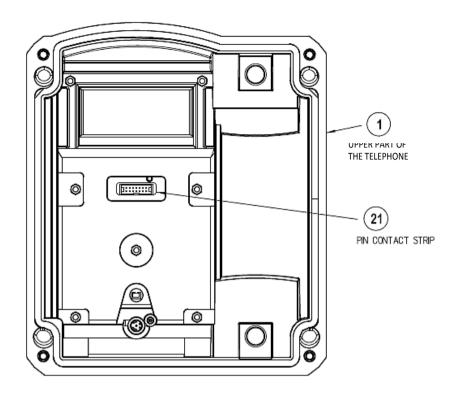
Inside view of telephone upper part.Note: The ZB version is not equipped with a pin contact strip.
